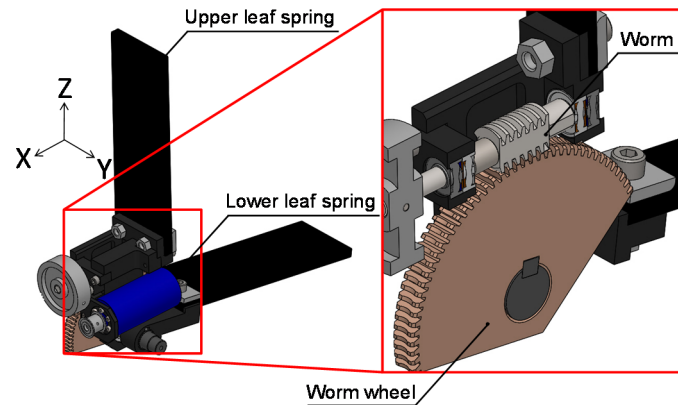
CAD model for the knee mechanism comprising two leaf springs and a worm gear.
